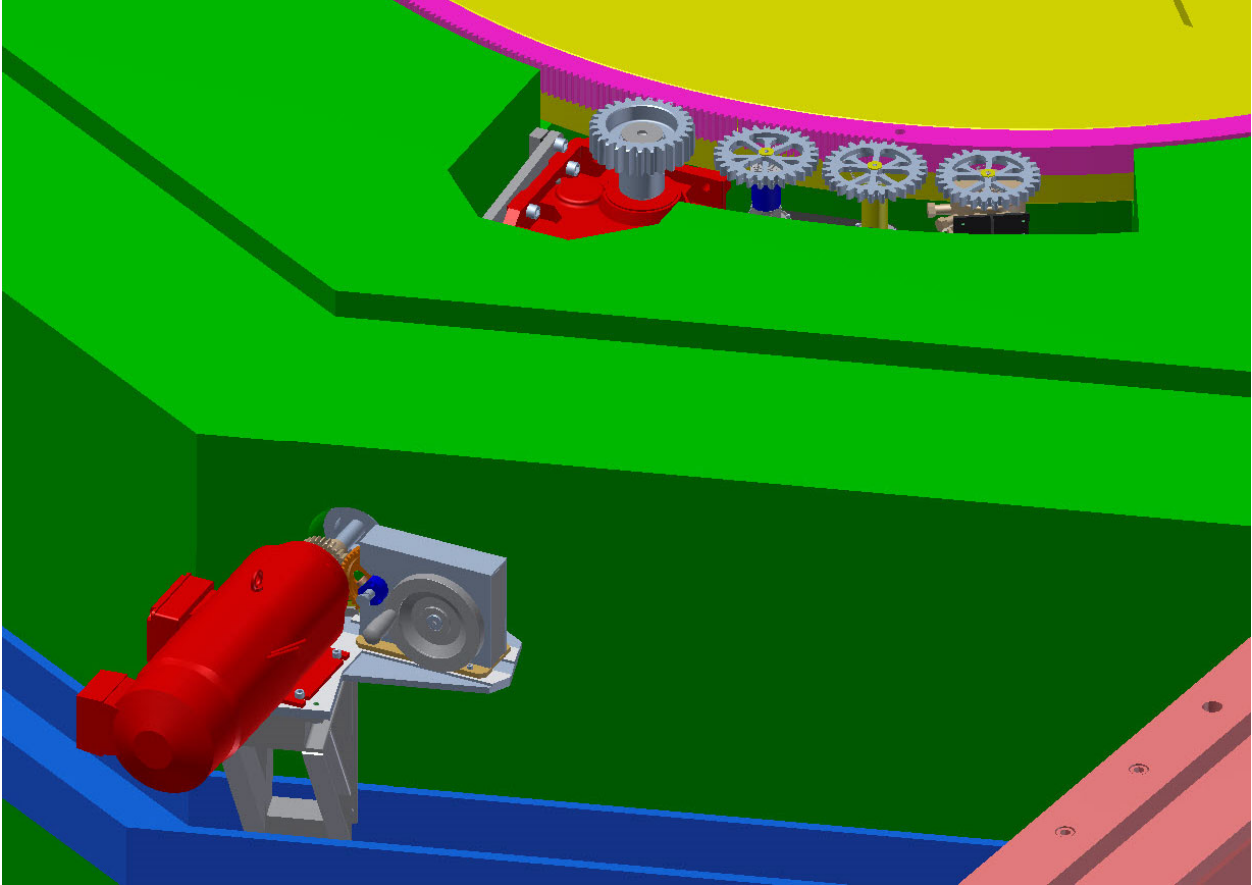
Detail view of rotating vessel cover drive motor, the gearbox, and the resolvers.
